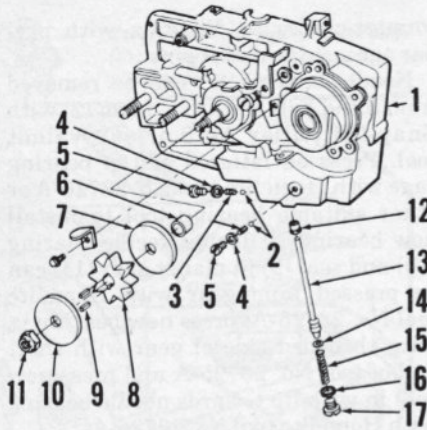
View showing chain drive sprocket and manual oiler pump components removed on models shown in Fig. HL64.
